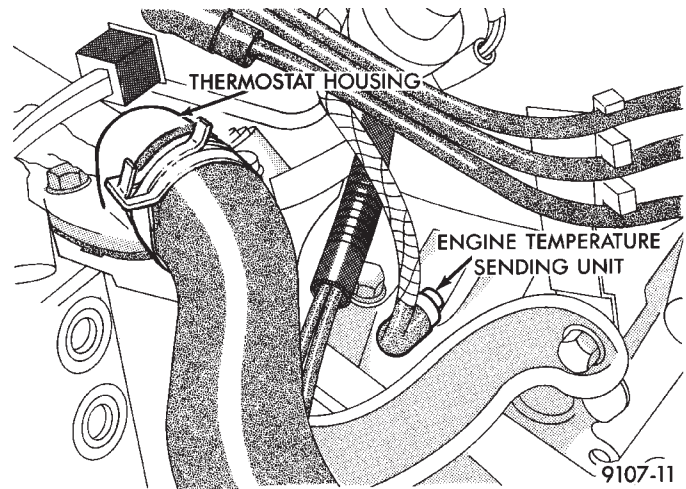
Engine Temperature Sending Unit 3.3L Drain/Fill
